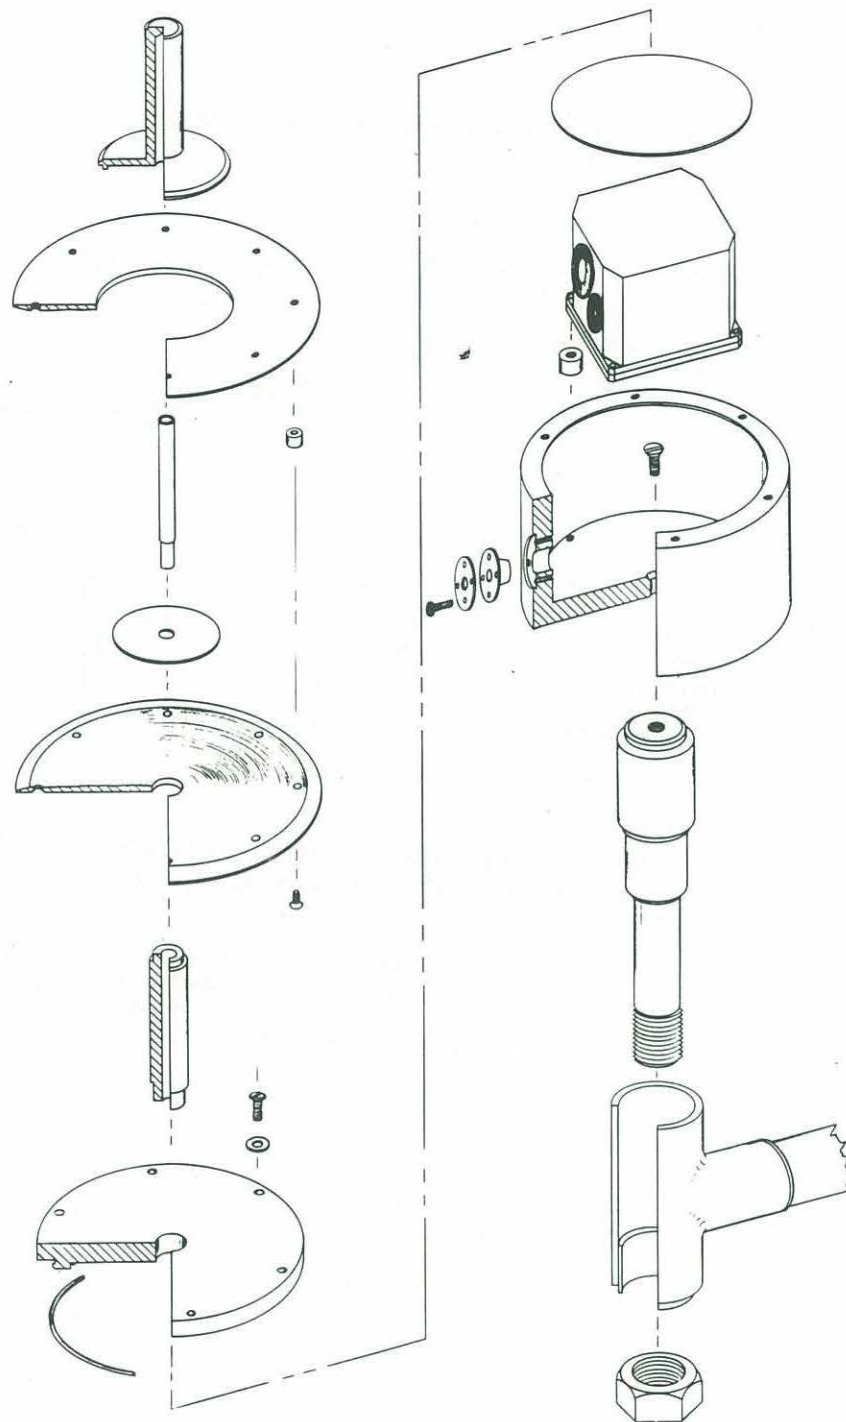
Exploded view of the parallel-plate port and sensor housing for barometric pressure measurements.
